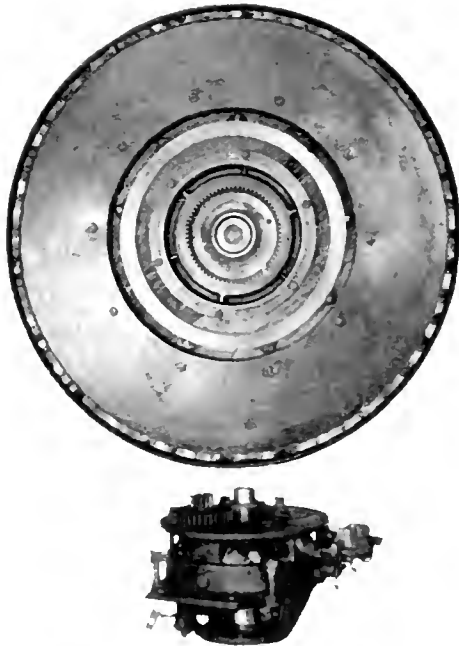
Under Side of Cable Reel showing Motor-driven Gear Train
